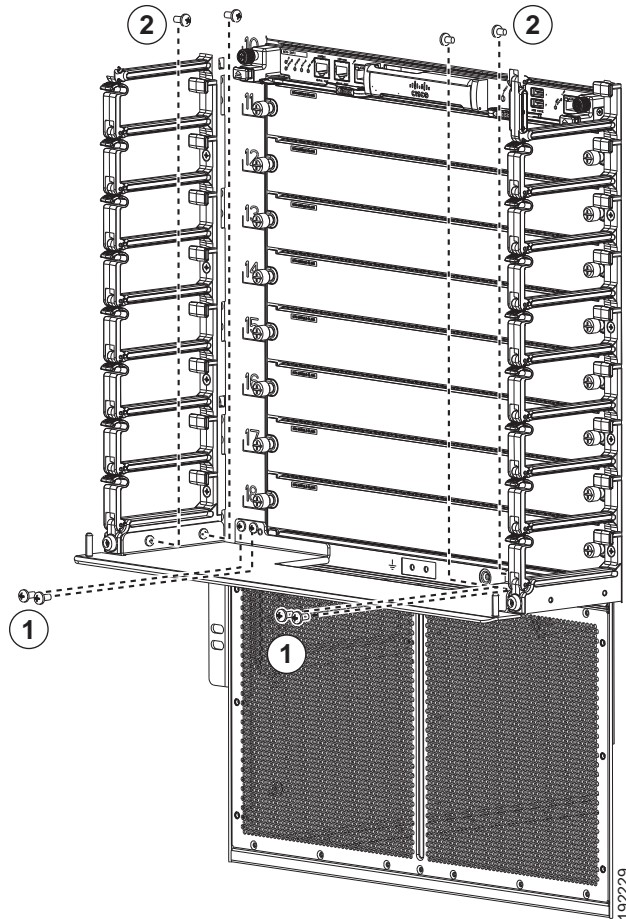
Positioning the Hinge Bracket to the Cable Management Frame and Chassis
